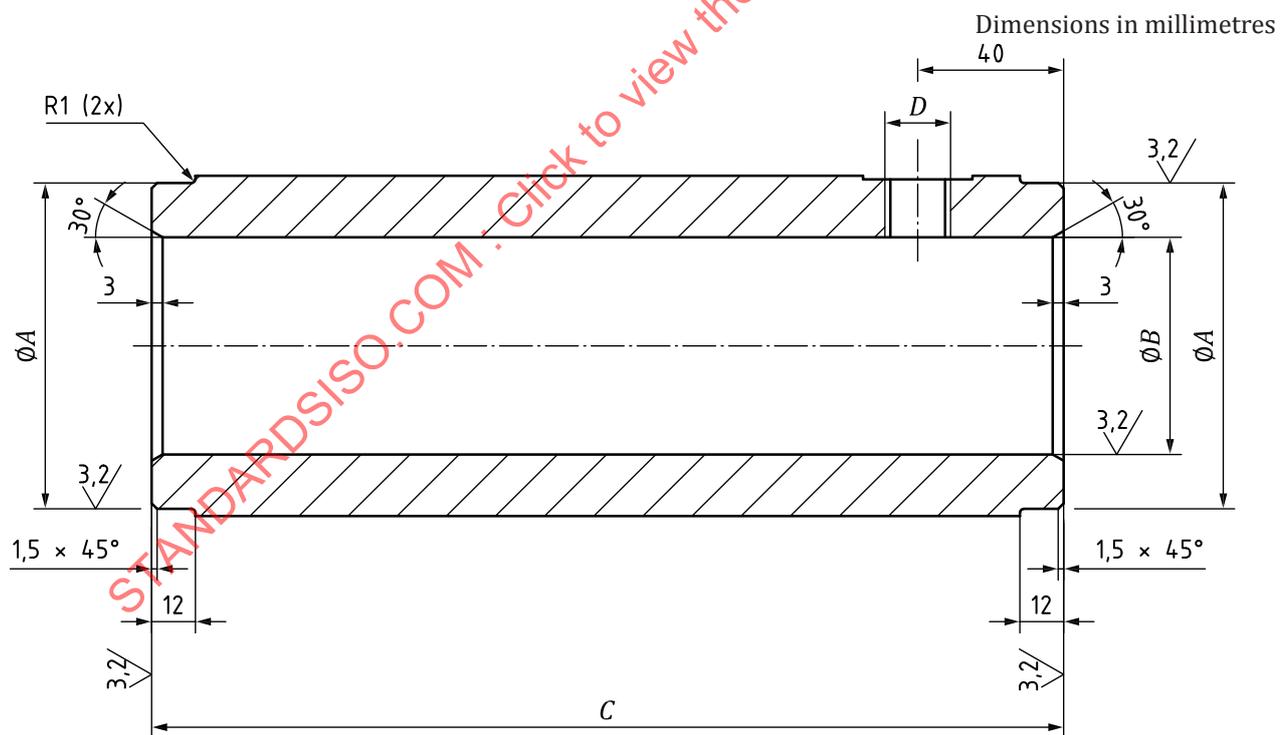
Dimension "A-A" — Dimension of cooling channels
